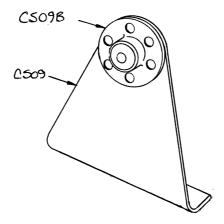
CS09 bracket with CS09B bellcrank assembly.
